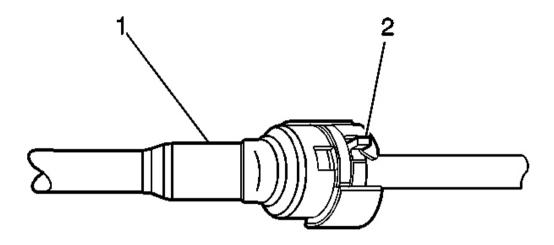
View Of Retaining Tab While Holding The Connertor Housing Courtesy of GENERAL MOTORS CORP.
